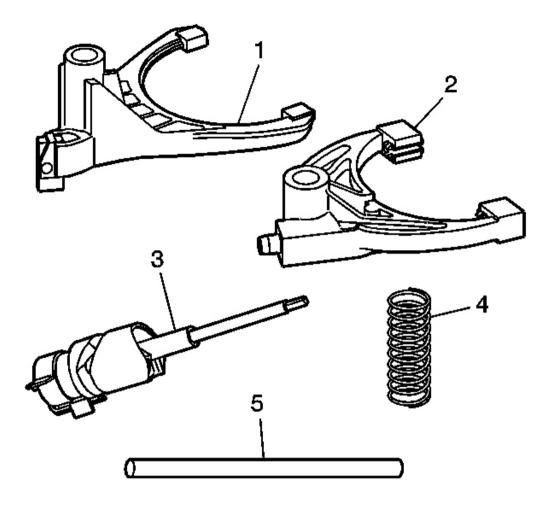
Cleaning Shift System Components Courtesy of GENERAL MOTORS CORP.
